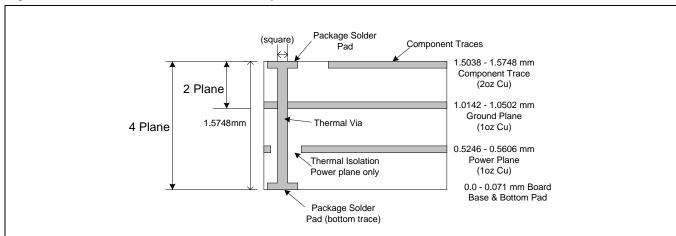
JEDEC Standard FR4 Multi-Layer Board – Cross-Sectional View
